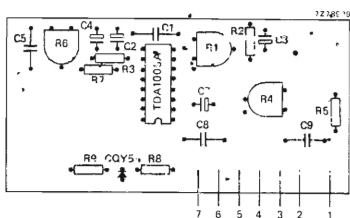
Printed-circuit board component side of a t.d.m. decoder, showing component layout. For circuit diagram see Fig. 10.
